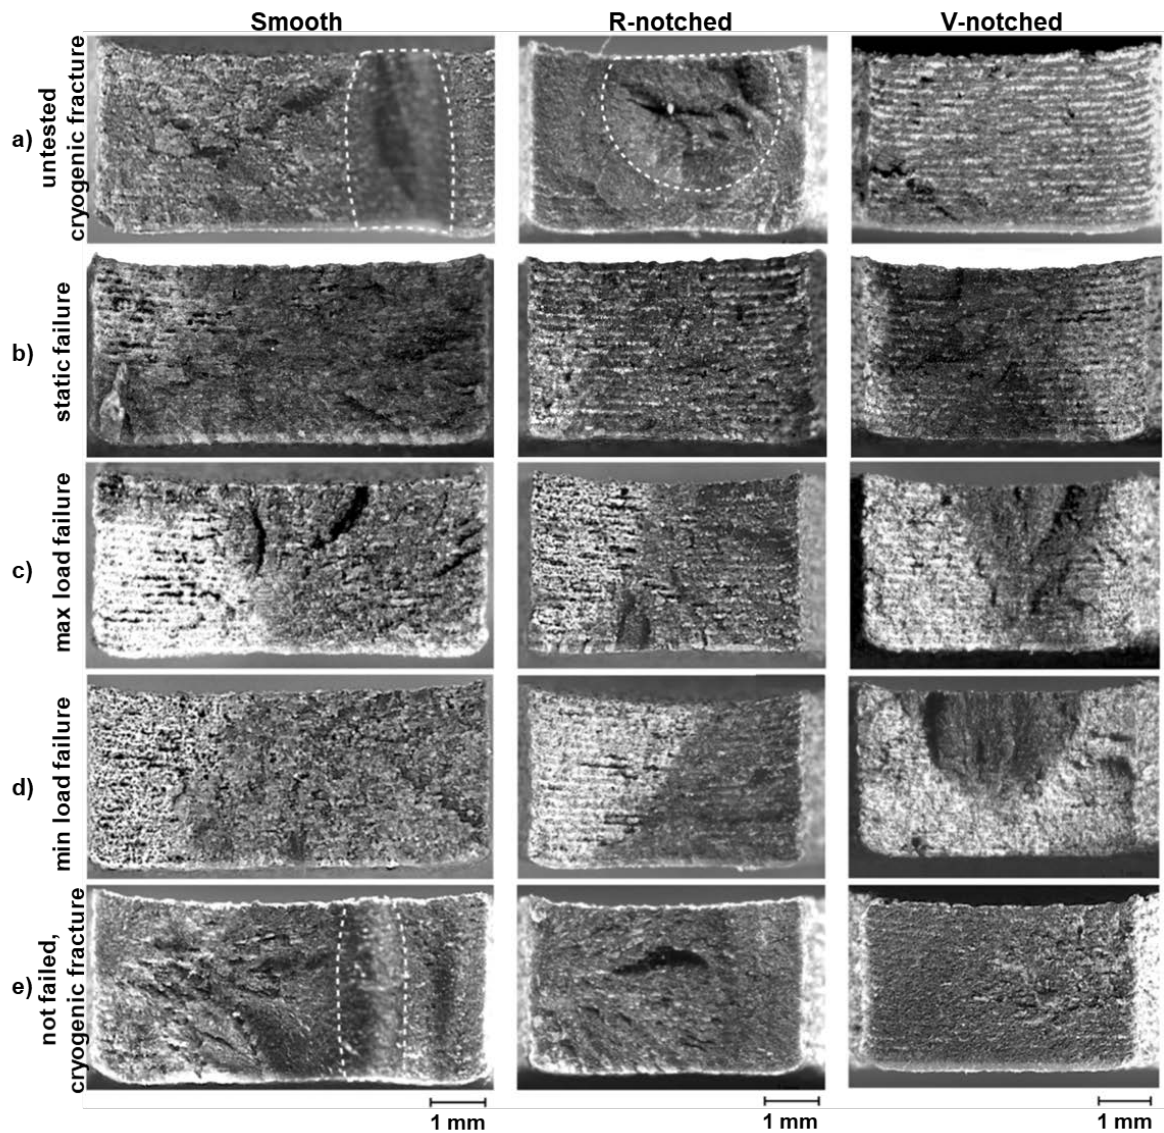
Fracture surfaces for the three types of specimen under specific failure conditions: a) untested specimens fractured under cryogenic conditions; b) specimen failed under quasi-static conditions; c) specimen failed under fatigue at the maximum applied stress for each polymer (Smooth and R-notched: about 36 MPa; V-notched: about 31MPa); d) specimen failed under fatigue at the minimum applied stress for each polymer (Smooth and R-notched: about 29 MPa; V-notch: about 20MPa); e) specimen not failed under fatigue after 106 cycles and post-fractured under cryogenic conditions.
